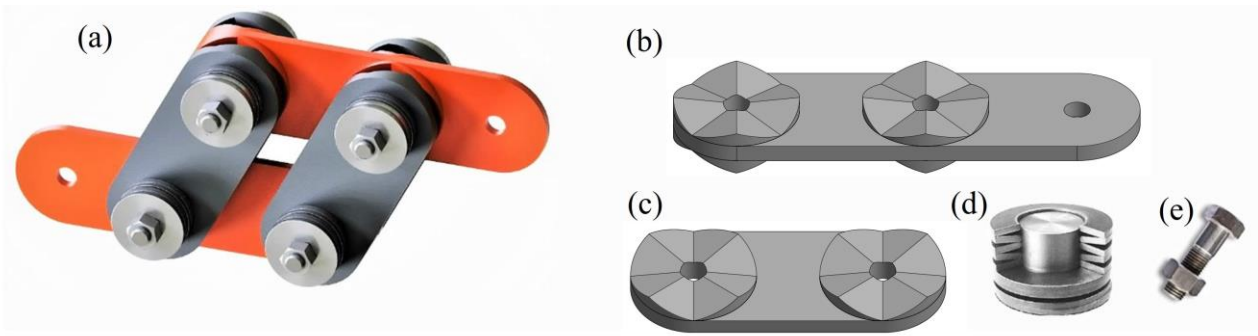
Rotational-RSFJ and its components: (a) schematic view of the damper assembly; (b) middle plate; (c) cap plate; (d) conical disk spring; (e) high strength bolt
